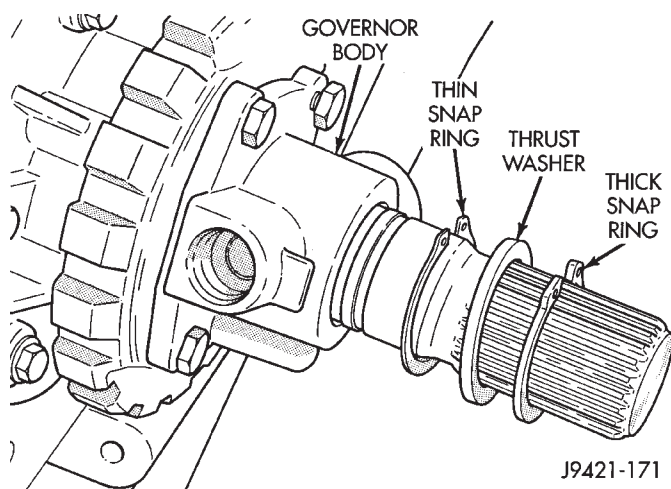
Governor Body/Park Gear Retaining Snap Rings And Thrust Washer Position
